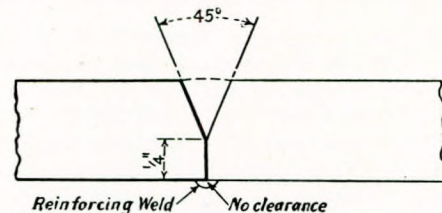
Plate edge preparation for automatic welds.
